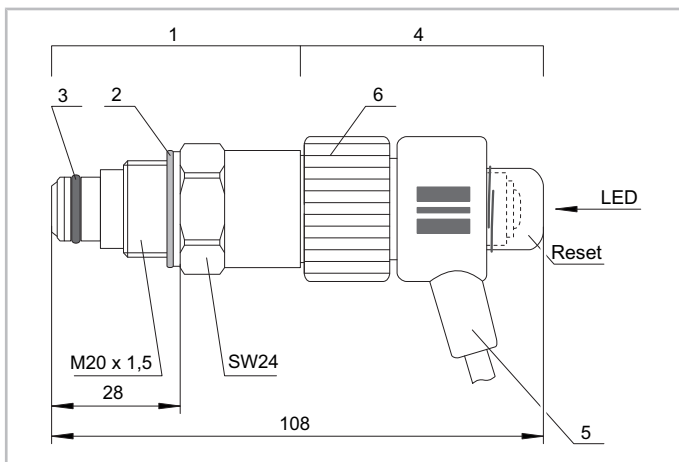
Differential oil pressure switch Delta-P, dimensions in mm.
